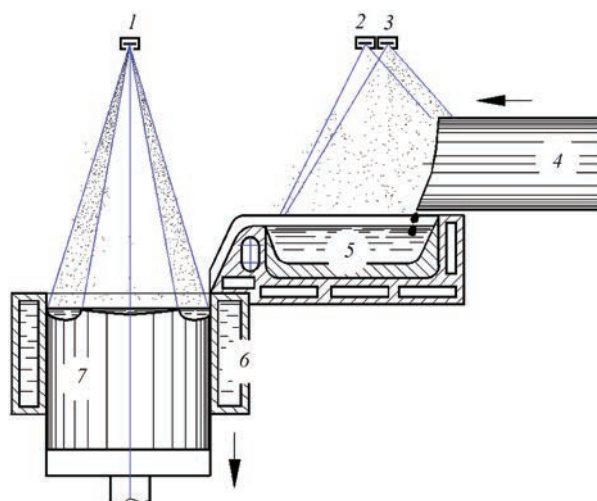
Scheme of cold-hearth EBM: 1–3 — electron beam guns; 4 — consumable billet; 5 — cold hearth; 6 — mould; 7 — ingot
